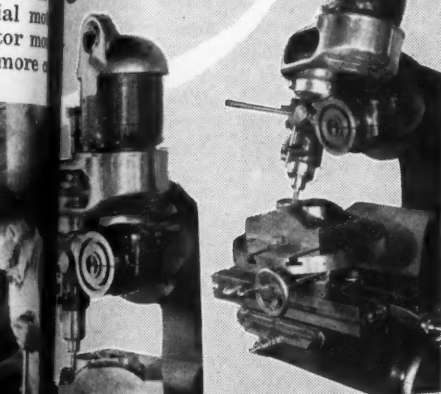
Vertical motor driving an engine machine. The drive from the motor to spindle is by means of V-belts.
